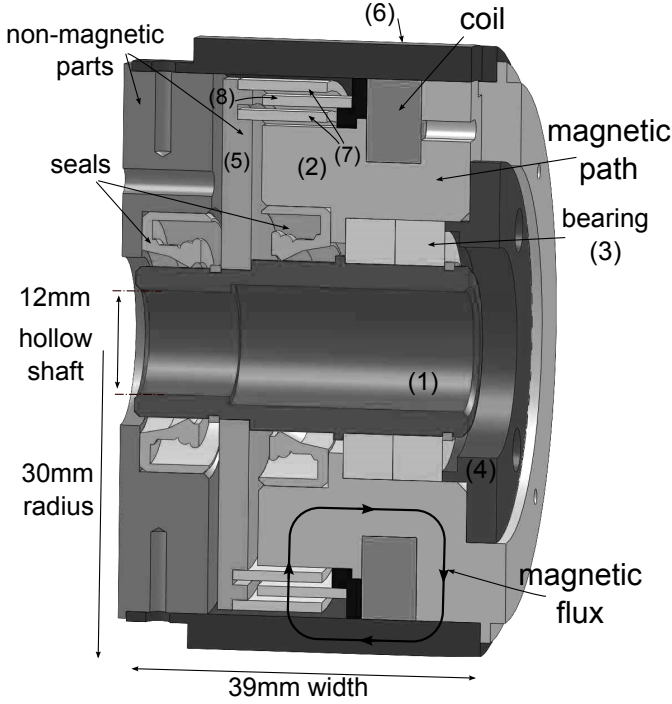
CAD cross-view of the MRF-brake. Attached to the hollow rotary shaft (1) a thin non-magnetic cylinder (5) supports two ferromagnetic cylinders which compose the fluid chamber. The coil is into the inner core (2) and thanks to the external housing (6), the magnetic flux is guided across the fluid gaps. A non-magnetic lateral support (4) blocks the translation of the axis and bearings. The brake has 30 mm radius with a 6 mm radius hollow shaft and 39 mm length. The expected torque in the linear range is 3.4 Nm.
